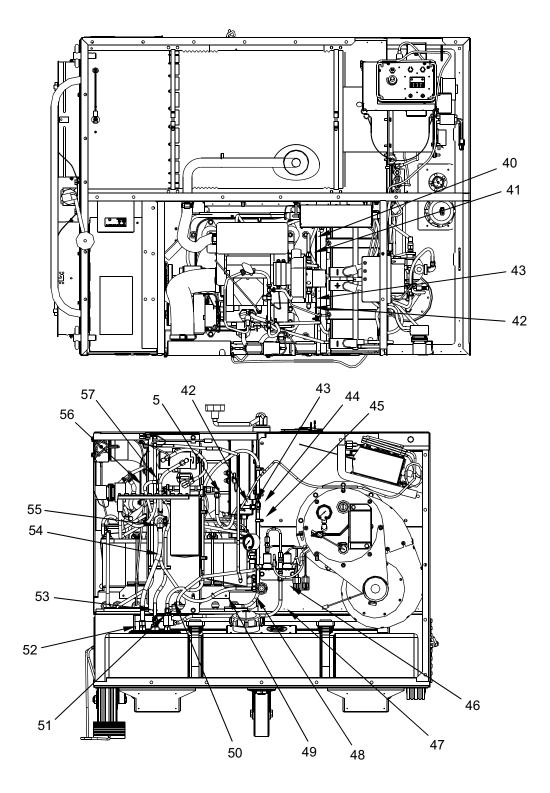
Fuel System Assembly (Sheet 4 of 5).
